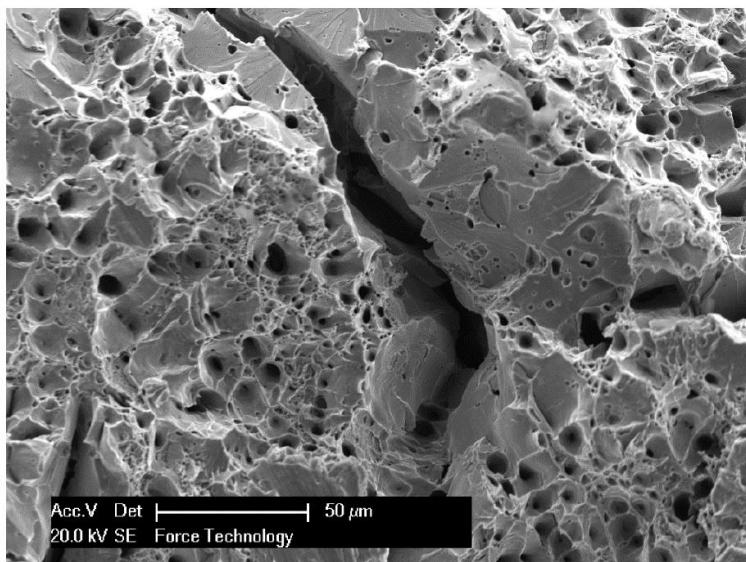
SEM micrograph of forward left hand steering rod fracture surface showing partial signs of brittle fracture surrounded by shear dimples.
